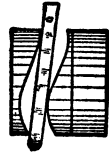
Contacts worn unevenly. A flat .020" gauge spaces contacts .030" to .050"
